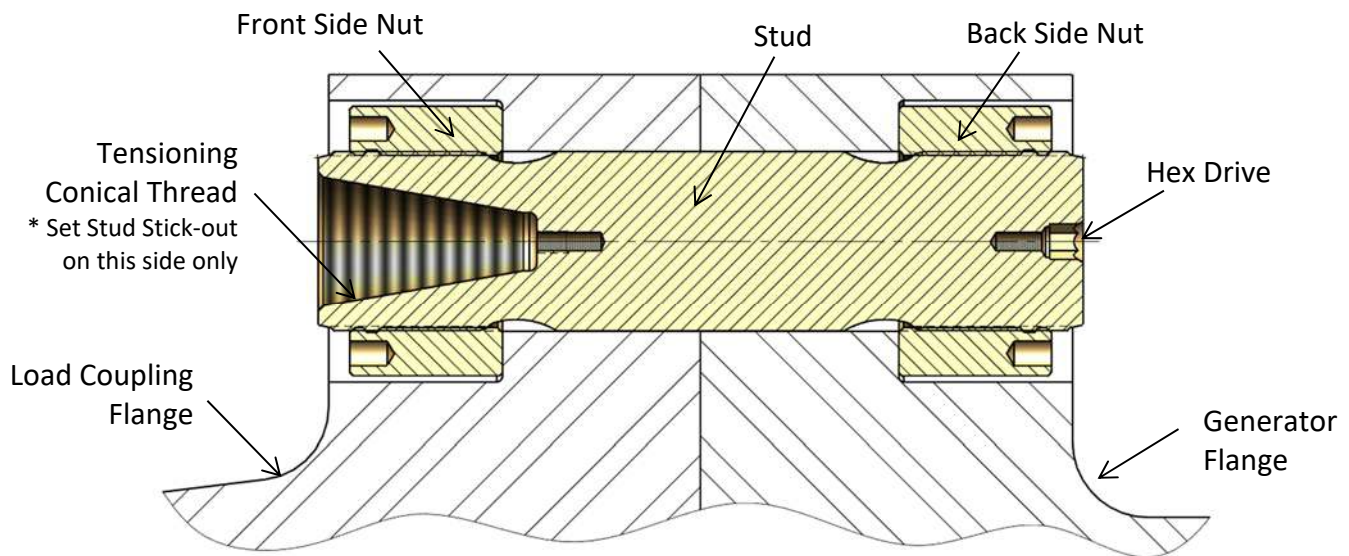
B – Cross-section View of Load Coupling to Generator Bolted Flange Connection
